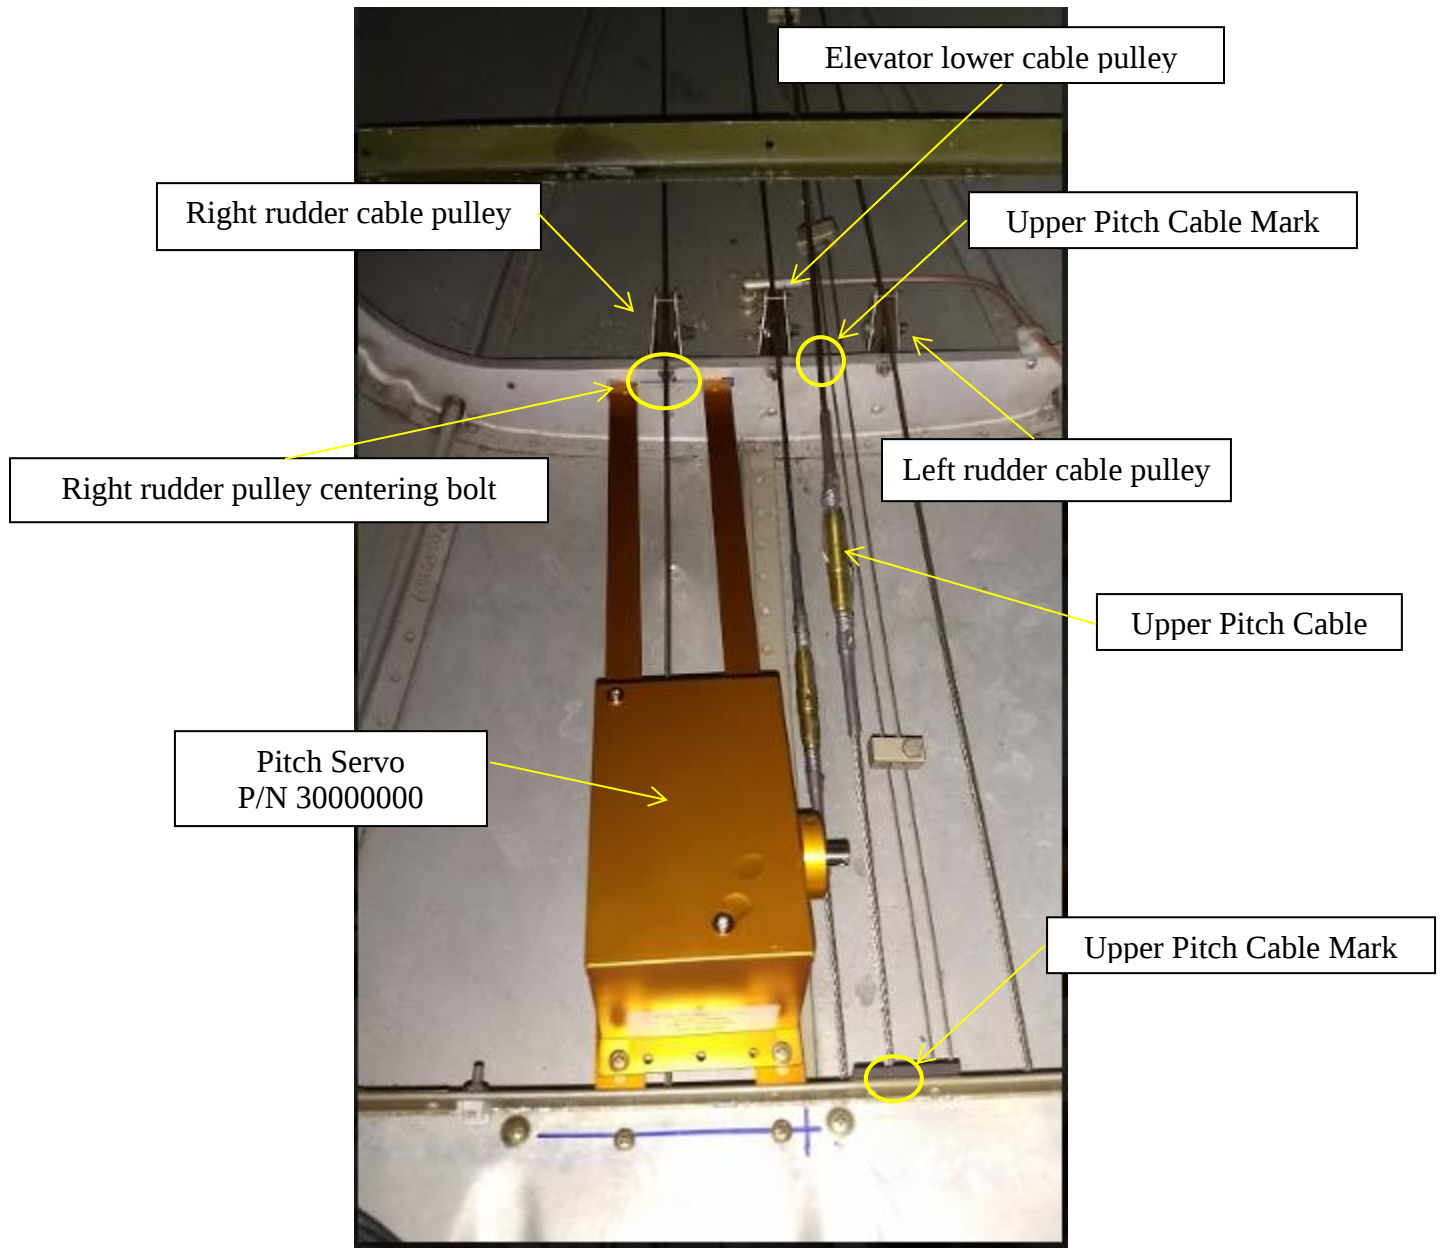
RIGHT RUDDER CABLE PULLEY
